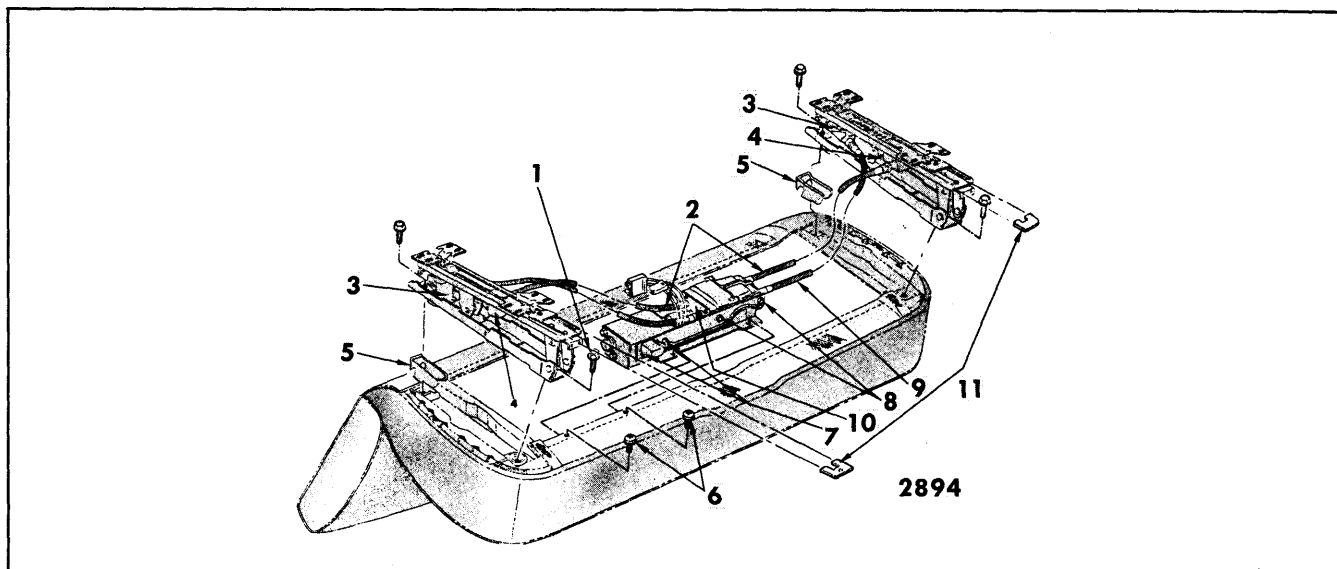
Front Seat Assembly - Four-Way Tilt - Buick "B, C &amp; E" Styles
